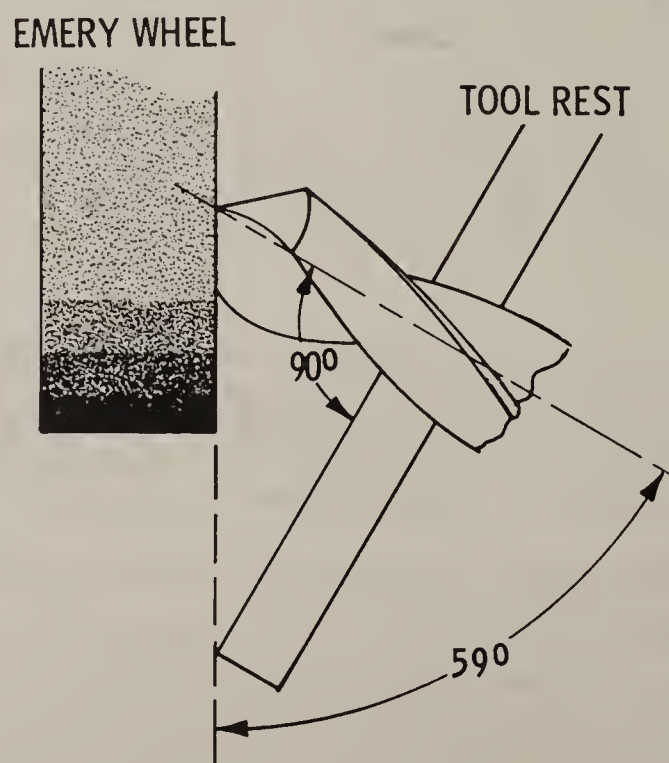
Method of grinding to obtain correct point angle. If the axis of the drill is held at right angle to the tool rest, the point will be correctly sharpened at the required angle. The wheel should be a special wheel made for grinding on the side.
